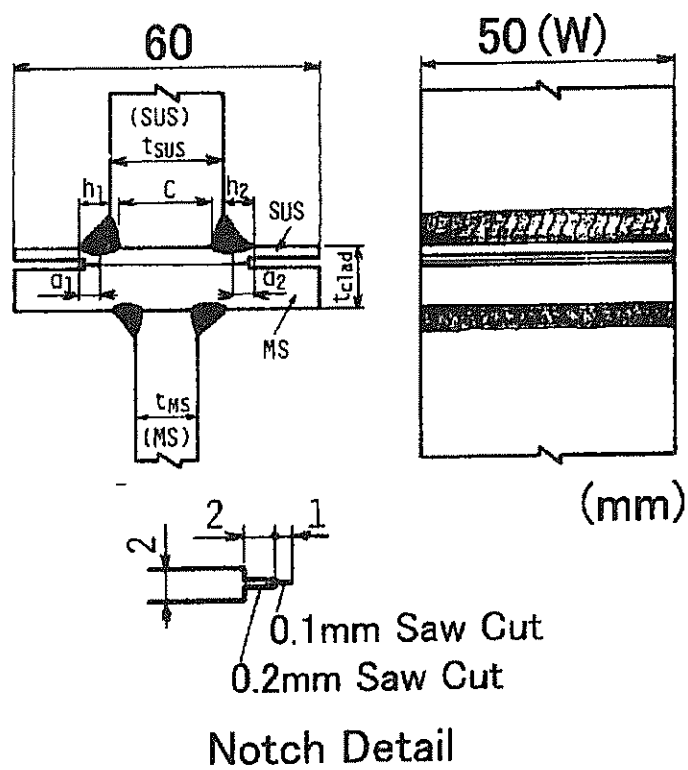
Shape and size of cruciform welded joint specimen for tensile fracture toughness test (Cruciform Type)
